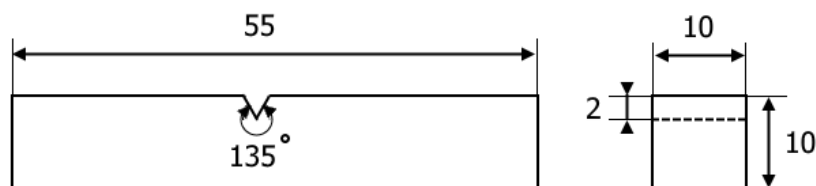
Schematic drawing of the Charpy impact test sample, including dimensions in mm.
